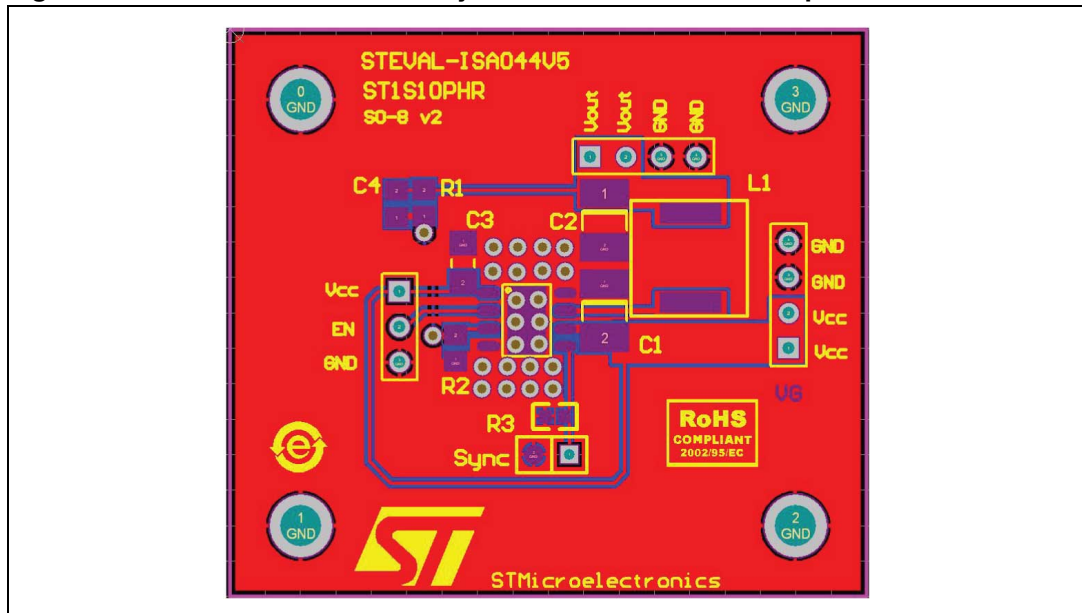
Demonstration board layout ST1S10 SO-8 ePad package - bottom side
